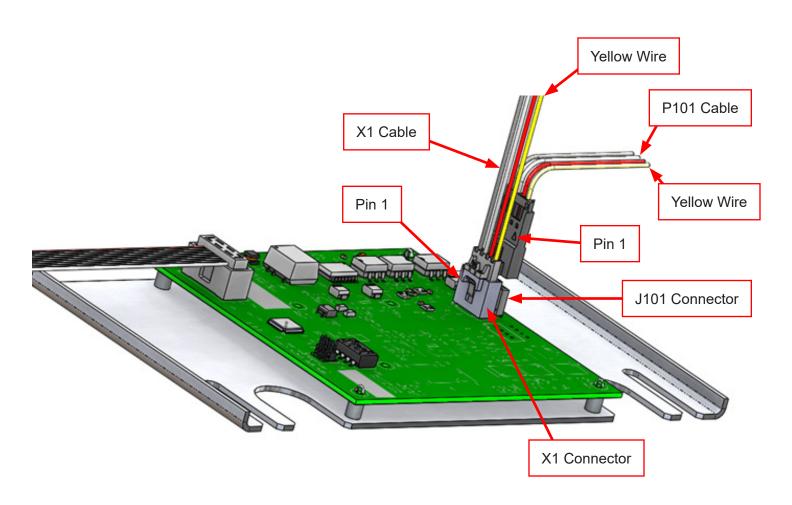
CAN Board Mounted to the mounting Bracket and the X1 and P101 Cables Connected to the X1 and J101 Connectors, Respectively, on the CAN Board 3. Loosen the two top- and bottom-right nuts from the DVS100/DVS150 control board assembly (Channel A) (Figure 5).
